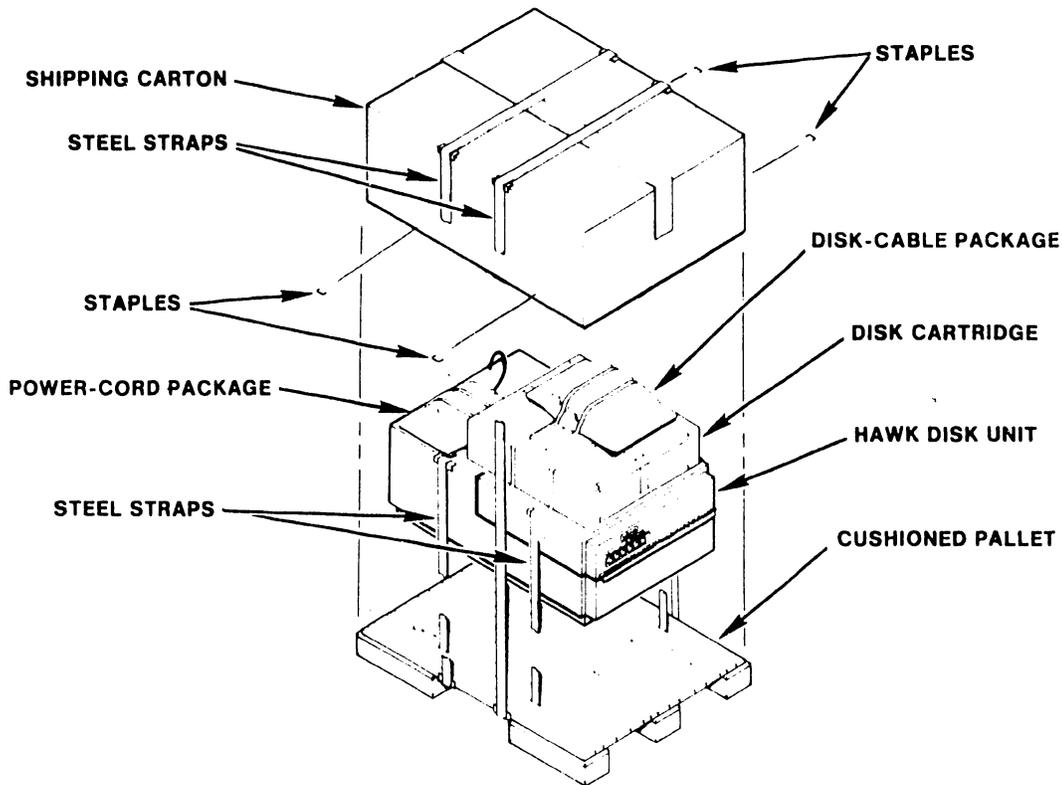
PACKAGING FOR THE HAWK DISK UNIT
